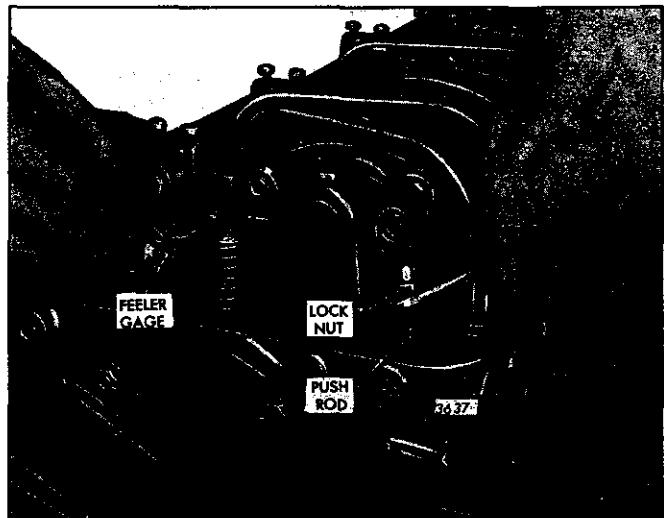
Adjusting Valve Clearance (Four Valve Head)
